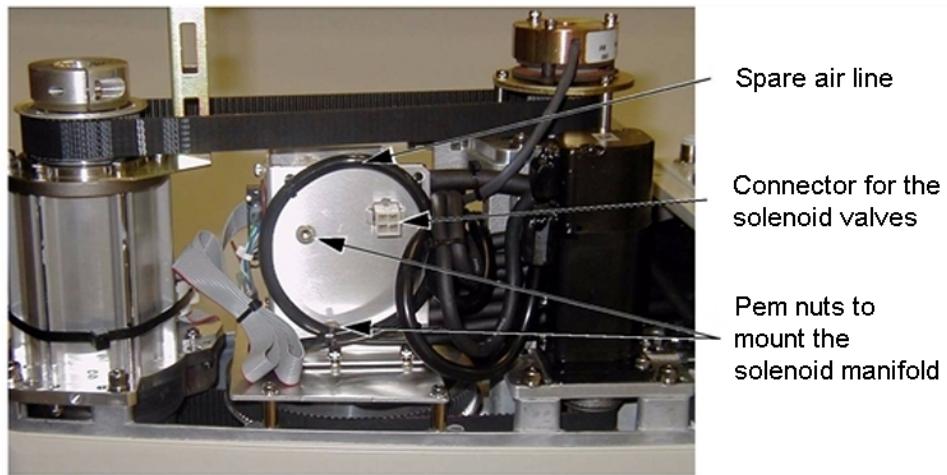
Solenoid Mounting Bracket with Connector and Spare Air Line
